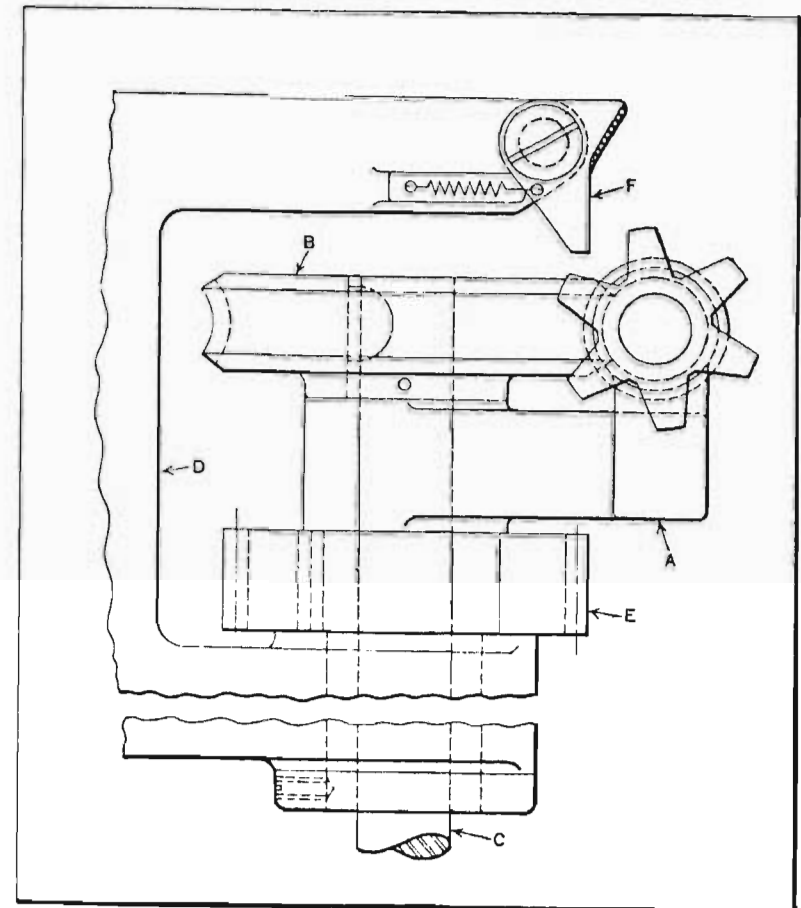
Device Used with Any One of the Drives in Fig. 13 or Fig. 14 for Gradually Varying the Reversal Points of a Shaft or Slide.
